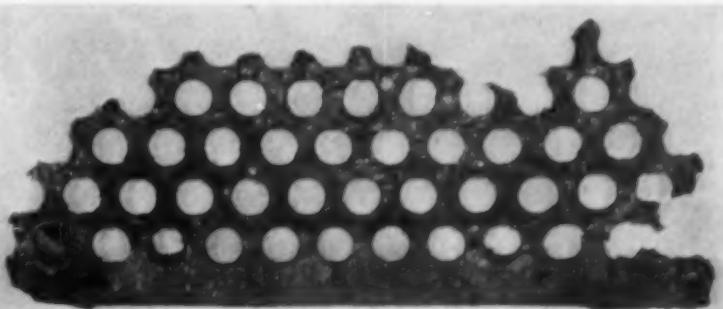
Stress-Corrosion Failure of a Type 347 Backing Plate of a Salt (NaCl) Drum Filter
